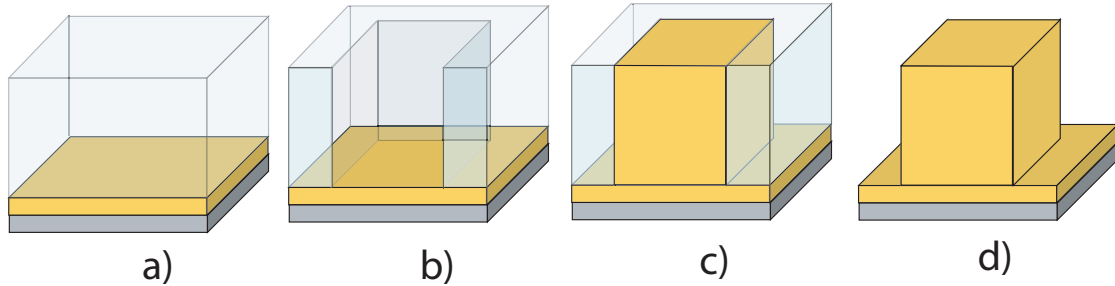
LIGA process steps: a) Mold deposition. b) Mold patterning. c) Electroplating. d) Mold Removal.
